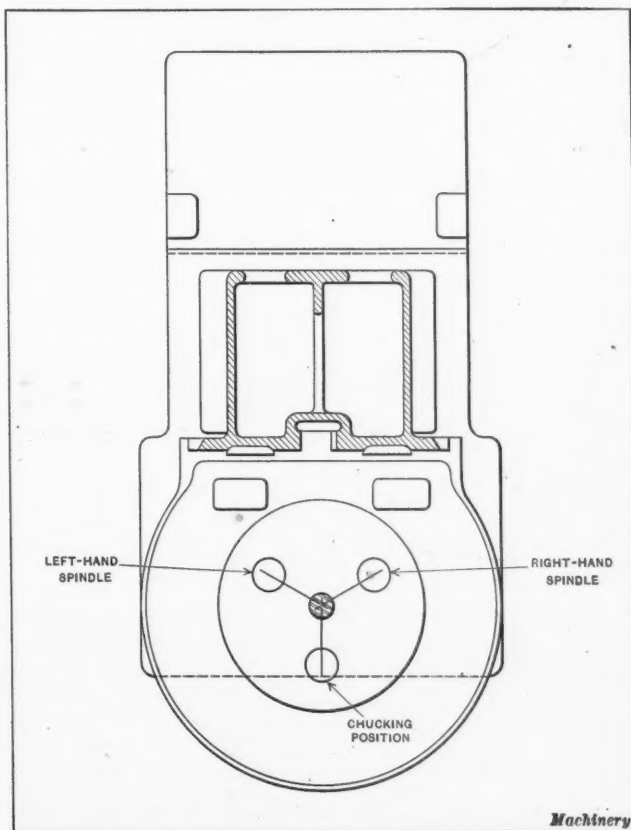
Diagrammatic Plan View of Machine showing Arrangement of the Chucking and Operating Positions
